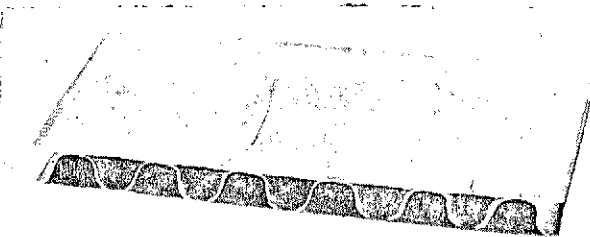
Diffusion-Welded Sandwich Plate - Core is TiV13Cr11Al3 - 0.13 mm Thick; Cover Plate is TiAl6V4 - 0.3 mm Thick.
